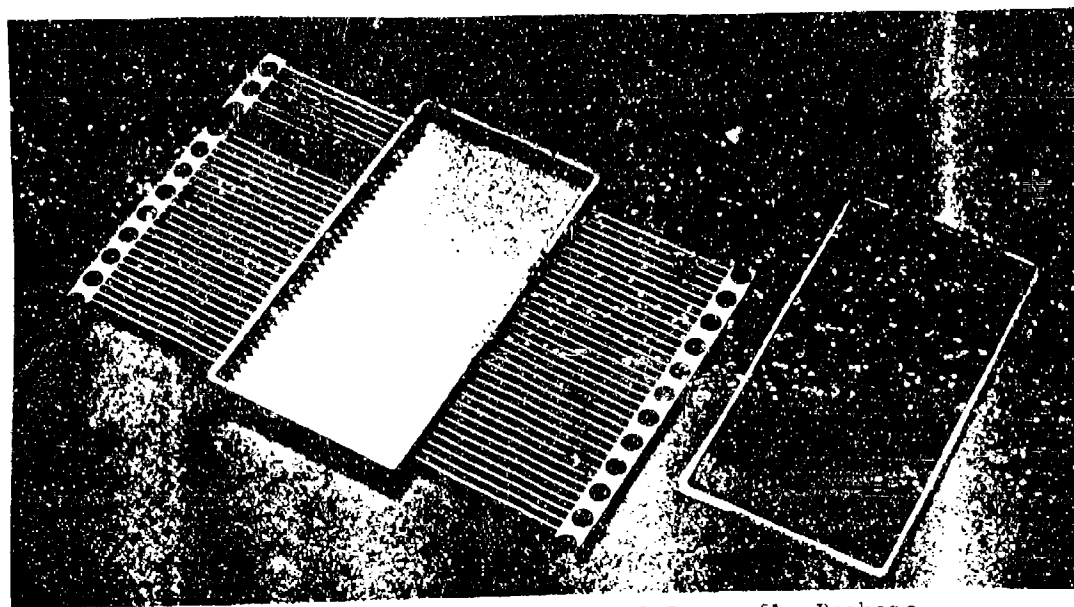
1" x 2" Welded Metal Butterfly Package
